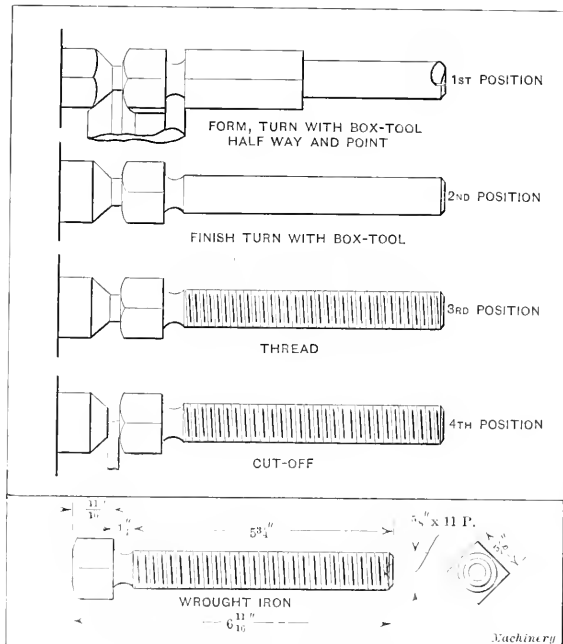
Order of Operations used in making a Long Square-headed Set-screw
